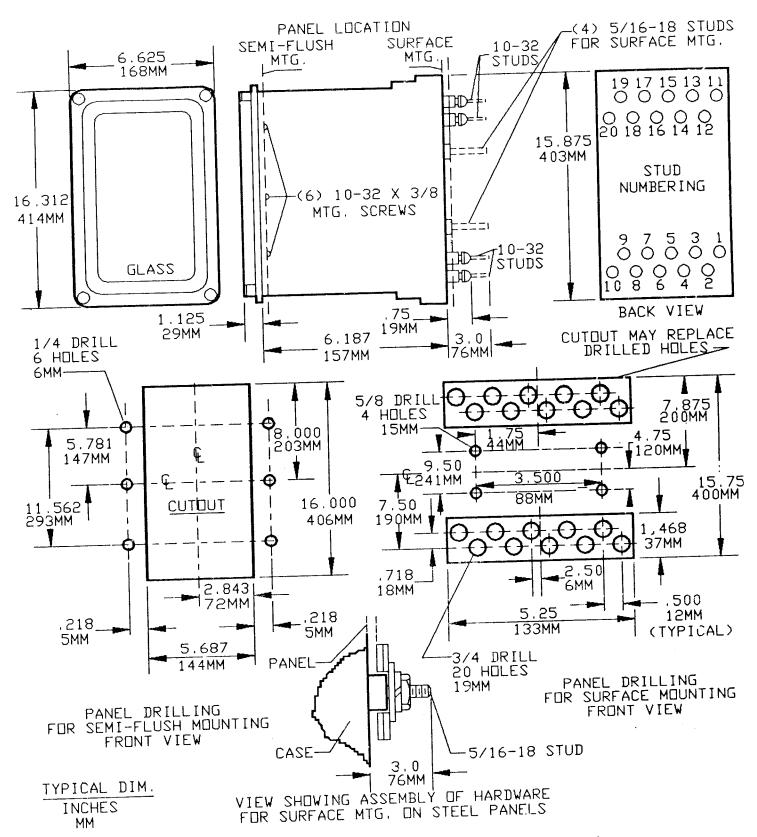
(K-6209274 [6]) Outline and Panel Drilling Dimensions for the GGP53C Relay
